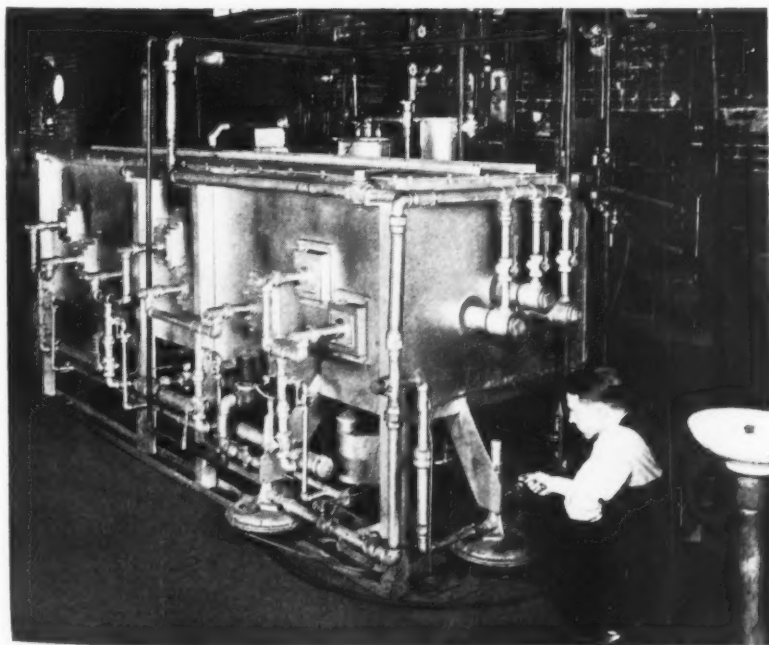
A Gas Preparation Unit for Carburizing Furnaces; to the Right in the Background is the Panel Board Indicating the Flow of Gases
